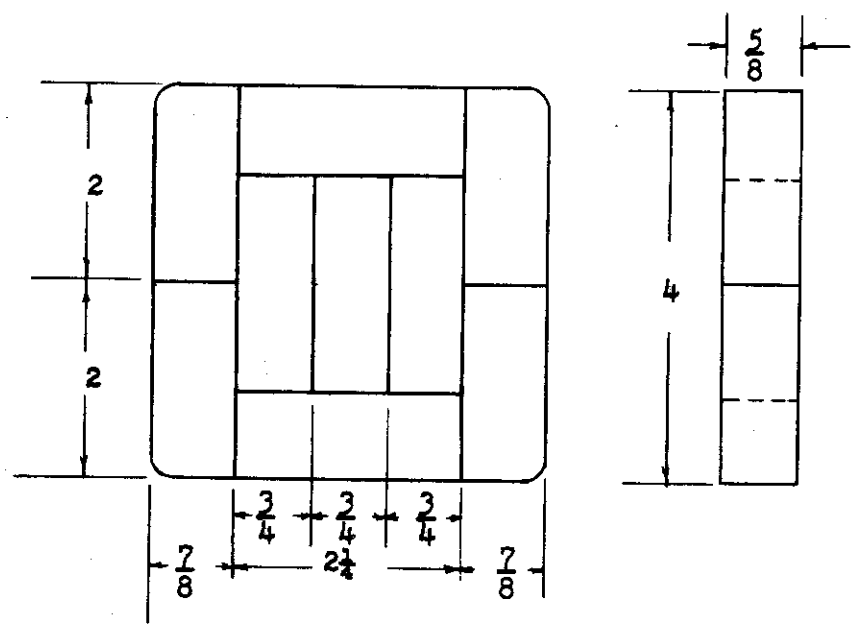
FIXTURE FOR ECCENTRIC TESTING
